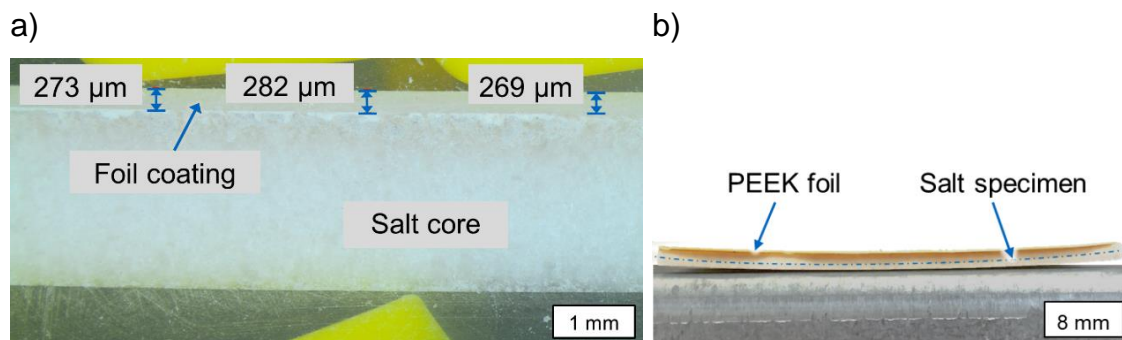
a) Foil coating layer thickness and b) specimen warpage [76].
